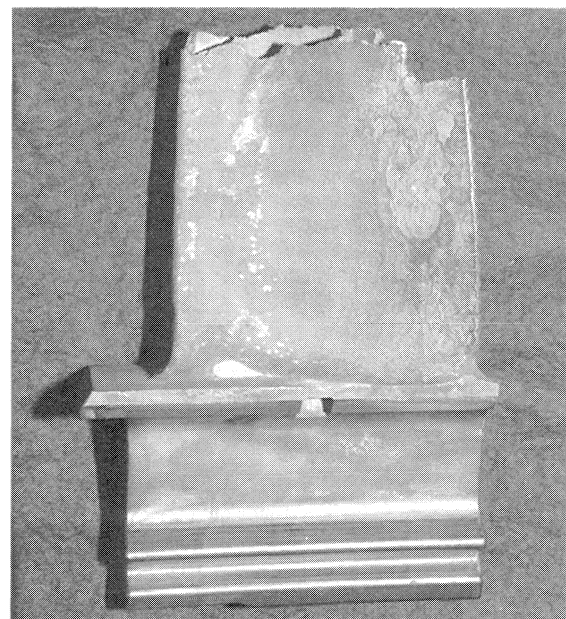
Pressure Side of Blading Showing Hot Corrosion and Partial Defeat of Some Cooling Holes.
